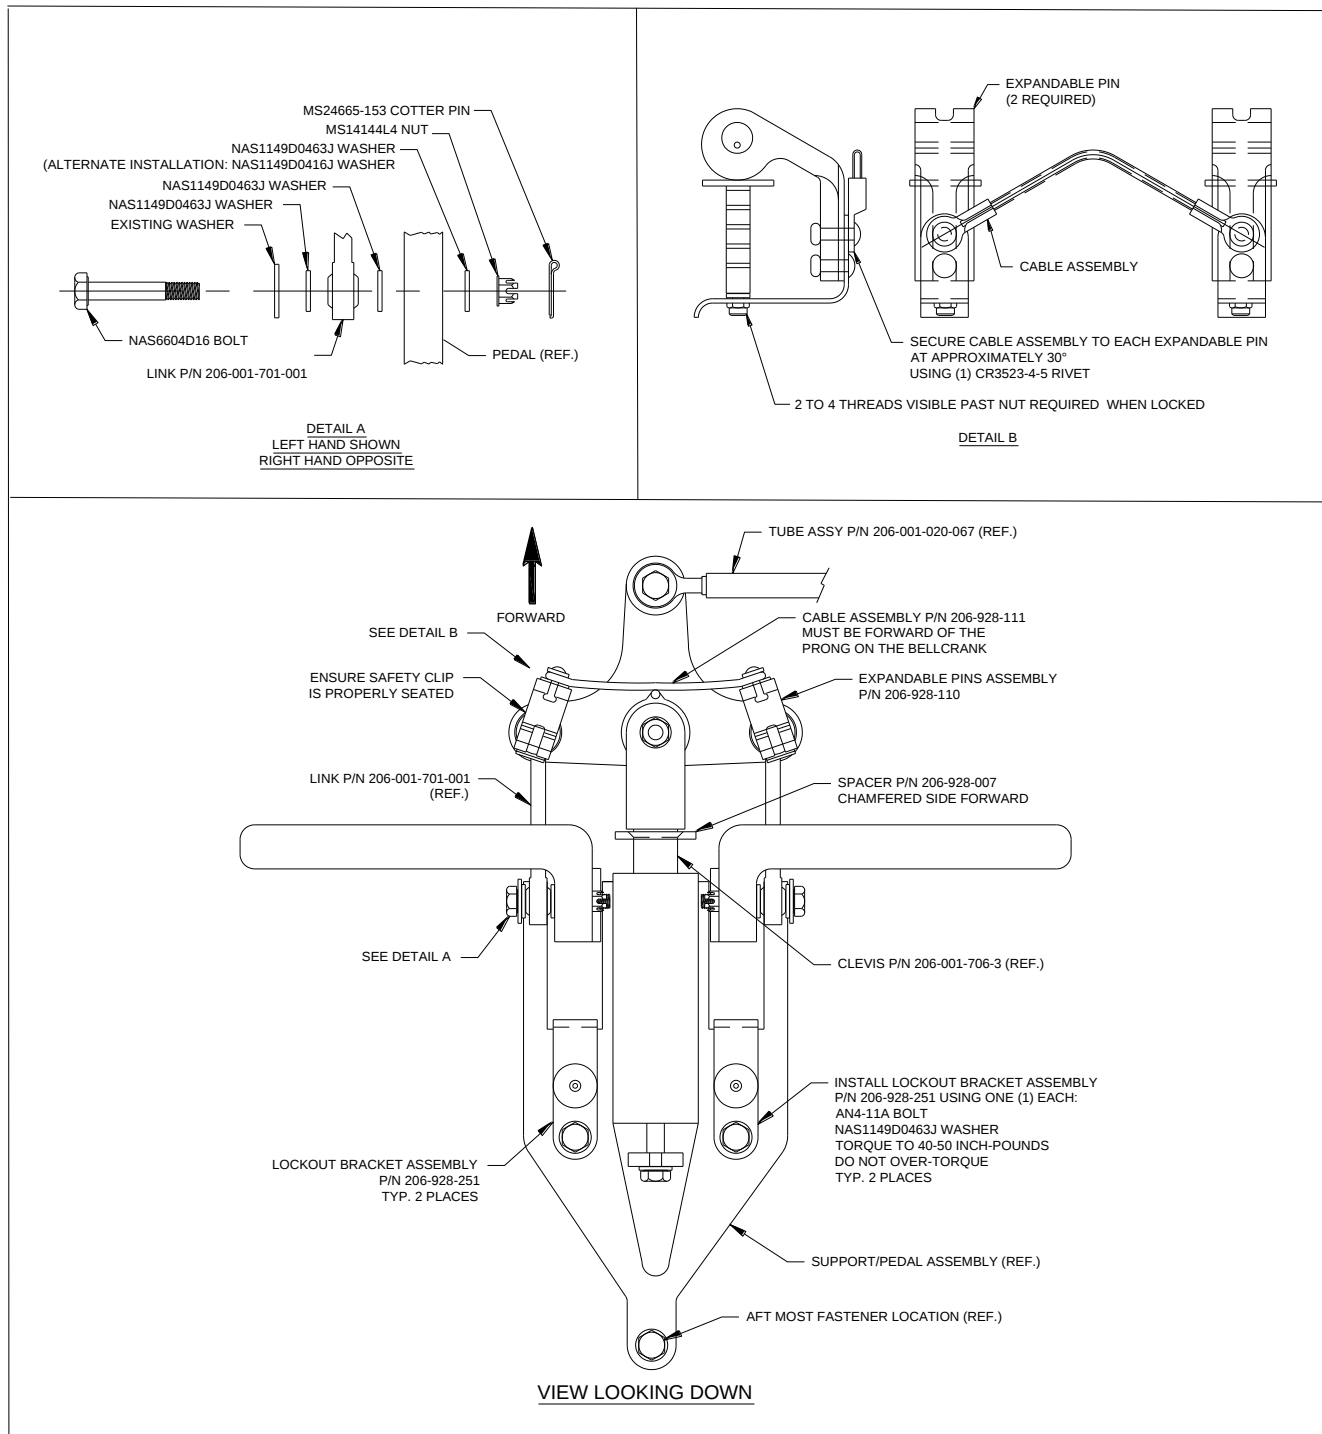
TAIL ROTOR PEDAL LOCKOUT KIT INSTALLATION
